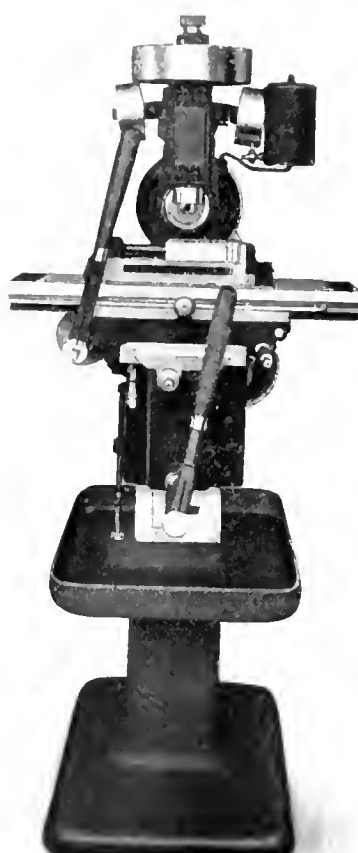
Front View of Chicago Hand Miller with Vertical Attachment
